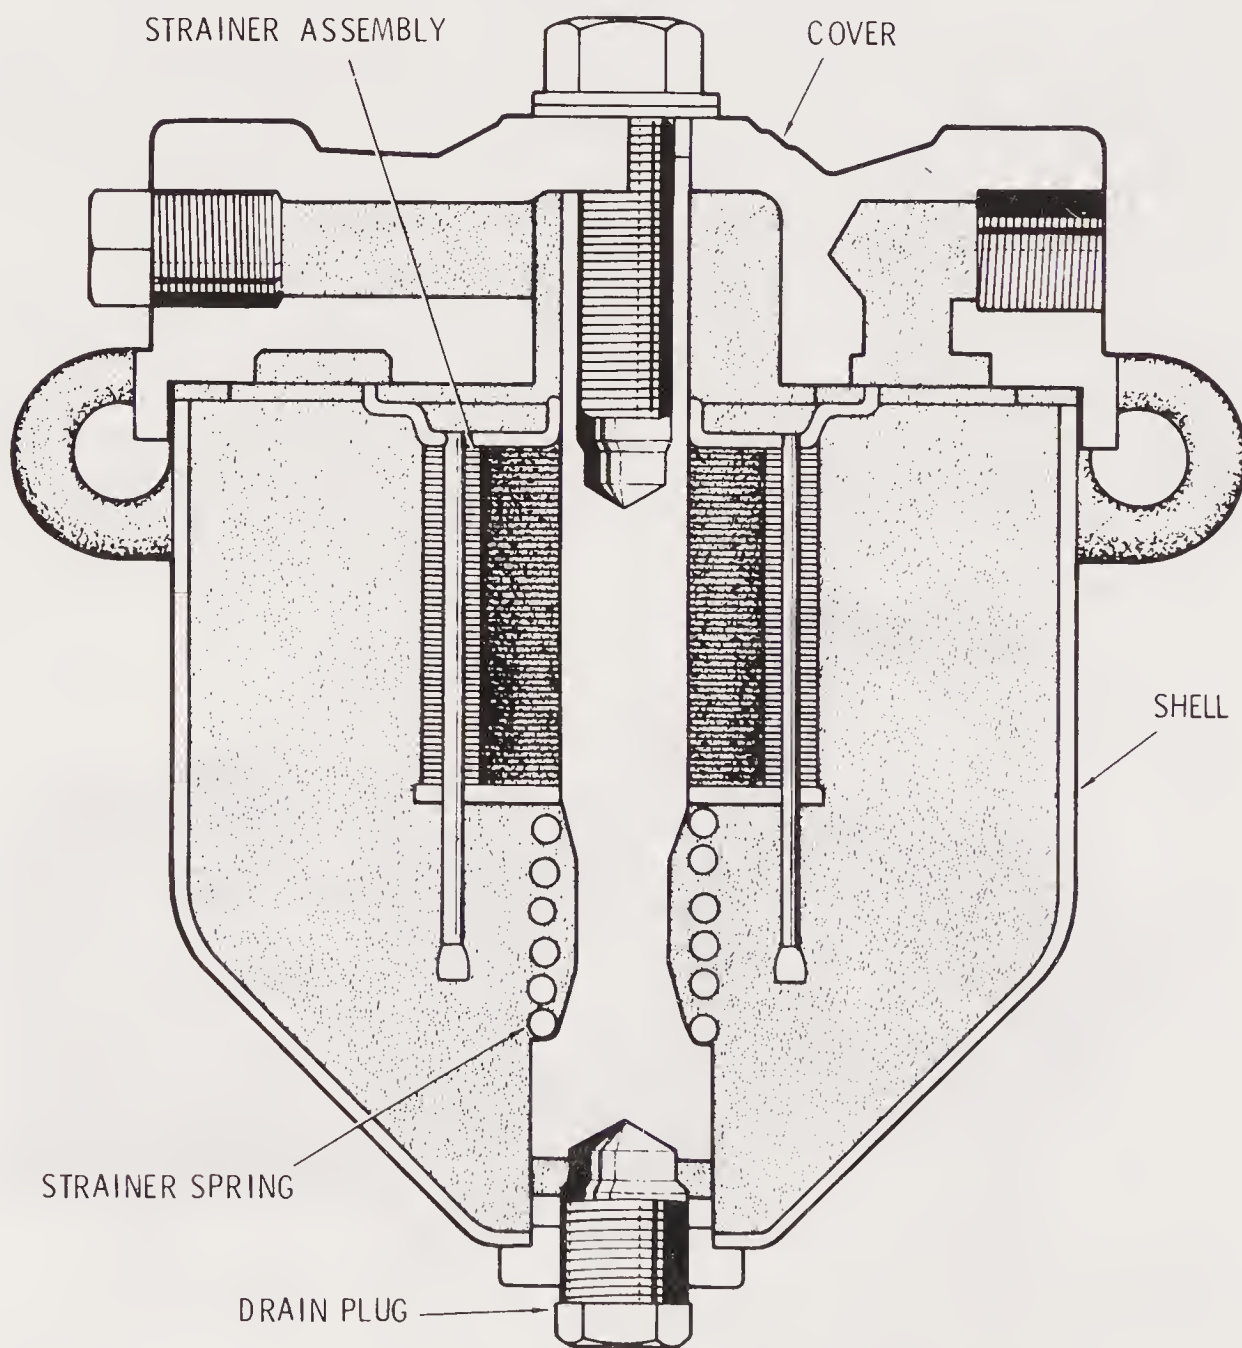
Typical fuel filter showing laminated disc assembly.
